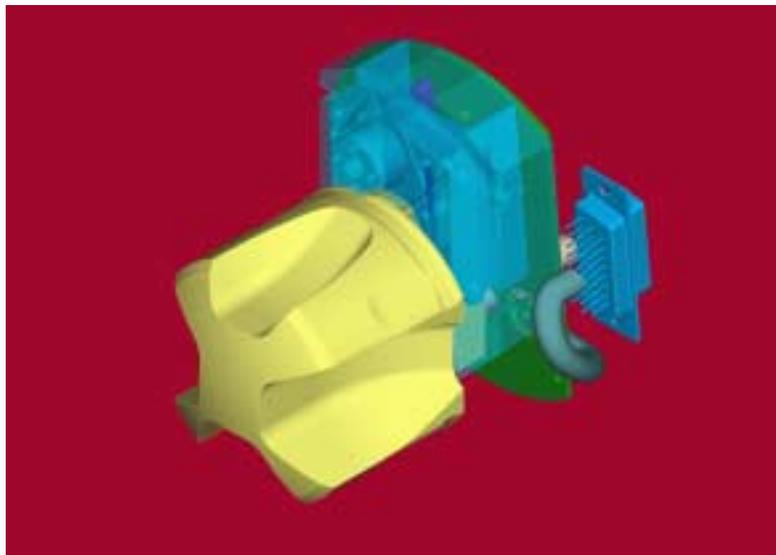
Sensor-head drawing with removed Al housing. Visible are quartz body (gold-yellow), cooling finger (blue), PCB (green) and electrical connector J4 (blue).
